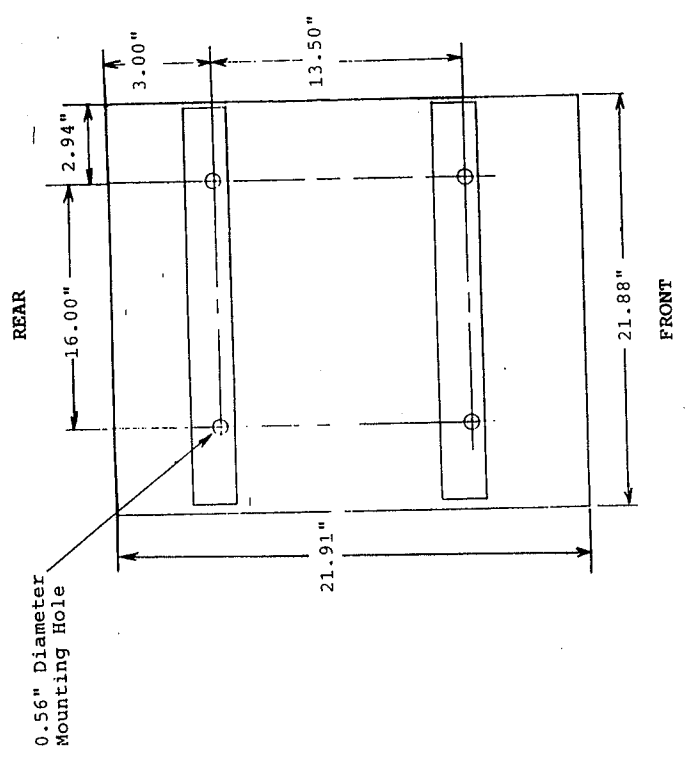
BOTTOM VIEW OF REGULATOR FRAME SHOWING MOUNTING HOLES
